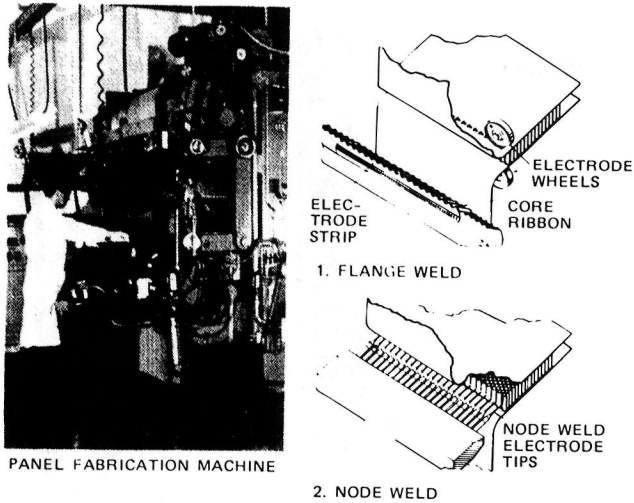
Honeycomb panel welding machine and manufacturing technique (courtesy of Astech).
